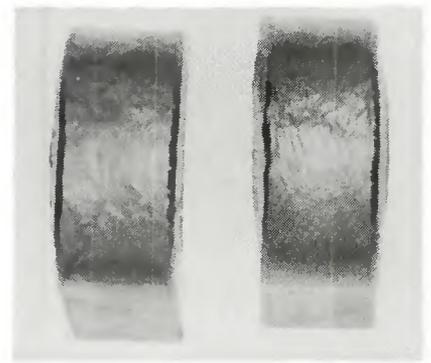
U-bend specimens from the welds. Note coarse grained weld zone
